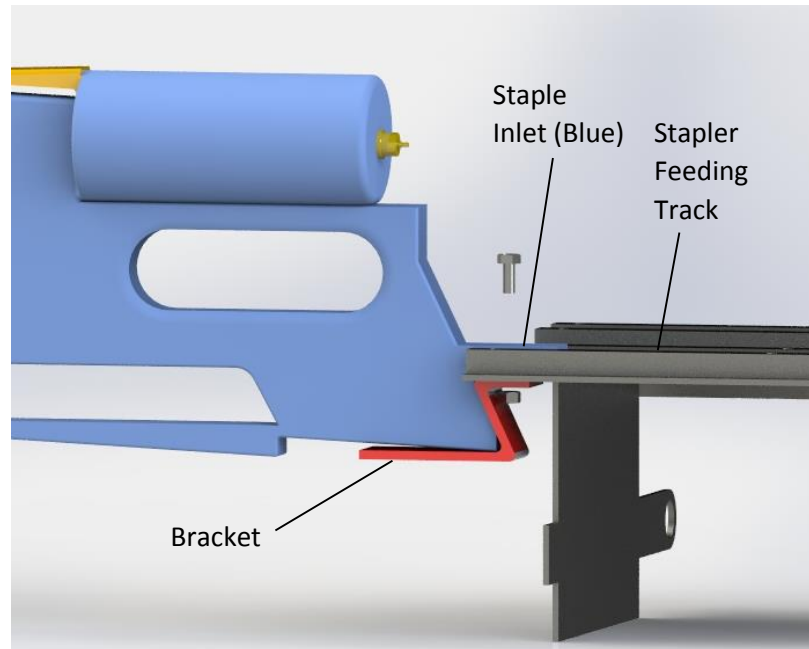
CAD render of the Senior A16/L pneumatic stapler mounting bracket [16].
